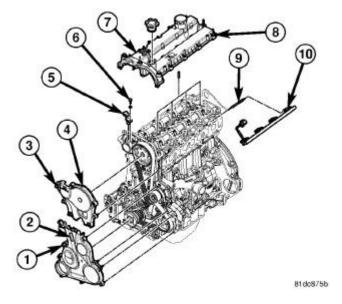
Upper And Lower Front Covers Courtesy of CHRYSLER LLC
